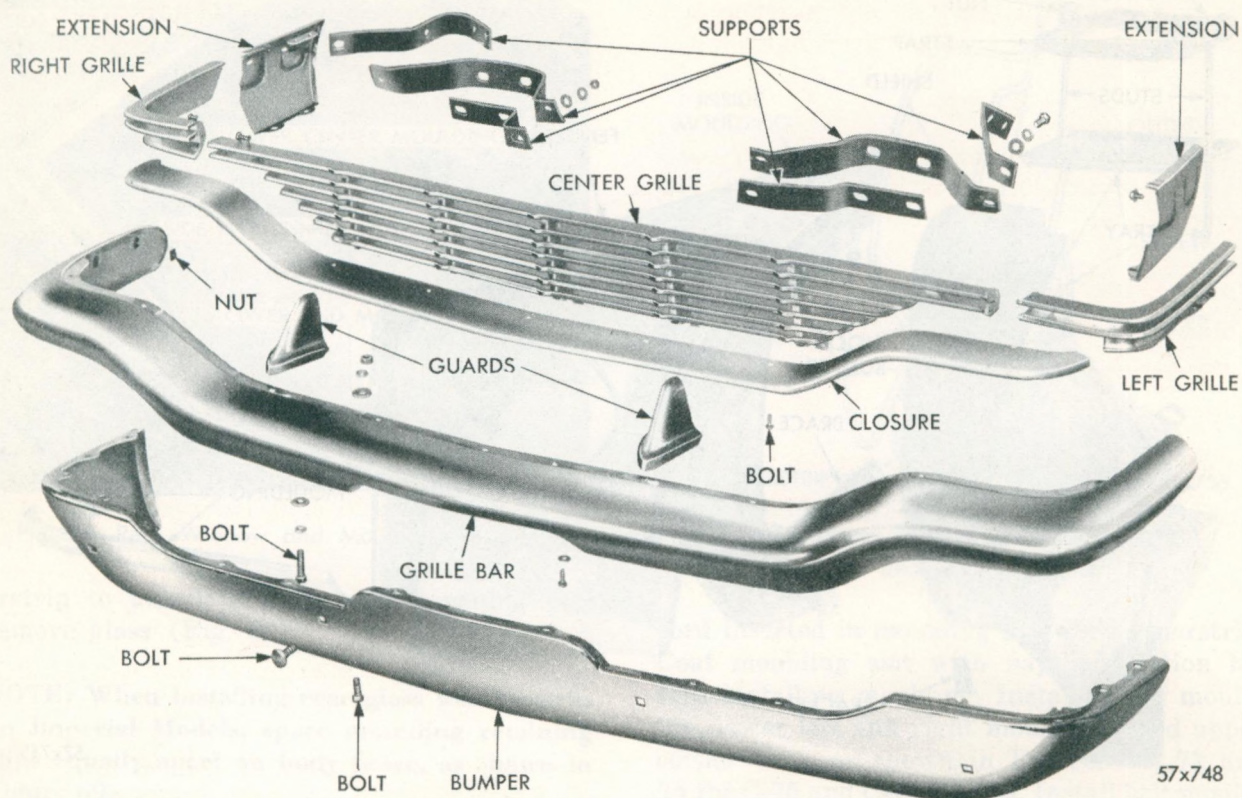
Bumper and Grill Assembly—C-75, C-76
